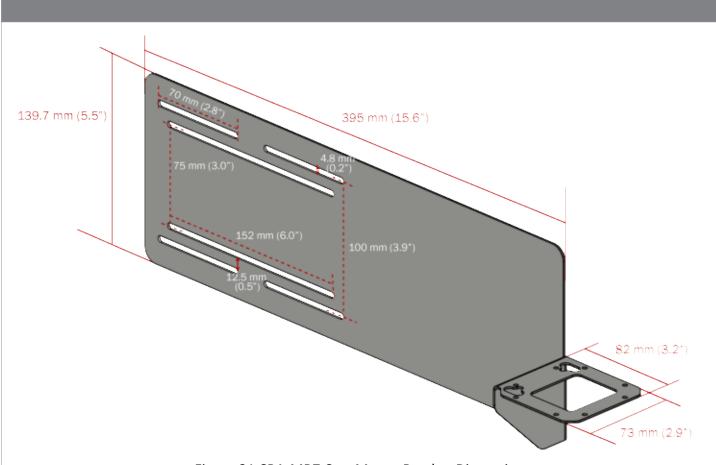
CRA-MB7 Cart Mount Bracket Dimensions
